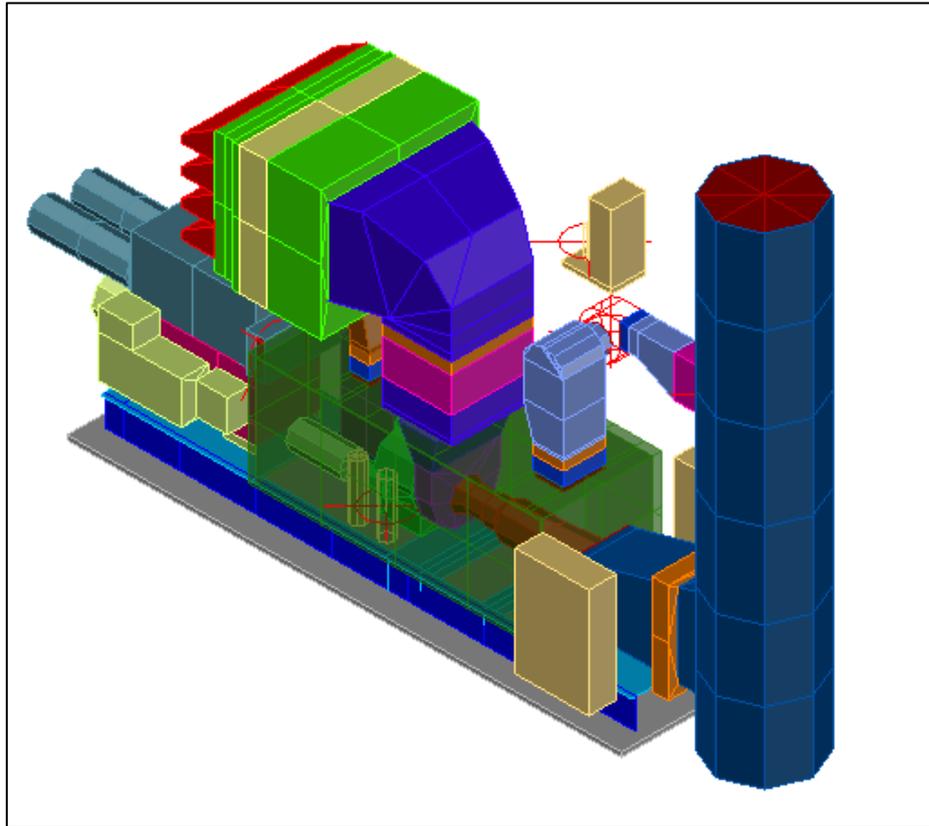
Geometrical model of the plant (detailed view 1, enclosure transparency 60%)
